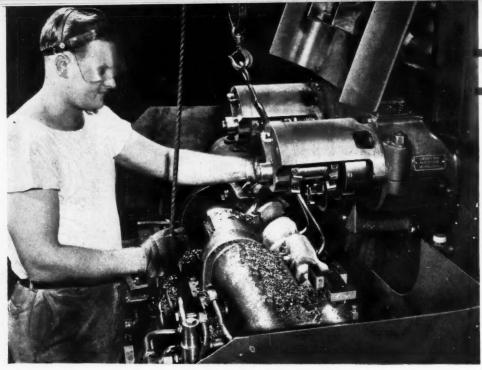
Locating and Driving Flats are Milled on the Cheeks of the Crankshafts at the Rate of Forty-nine per Hour in This Set-up
